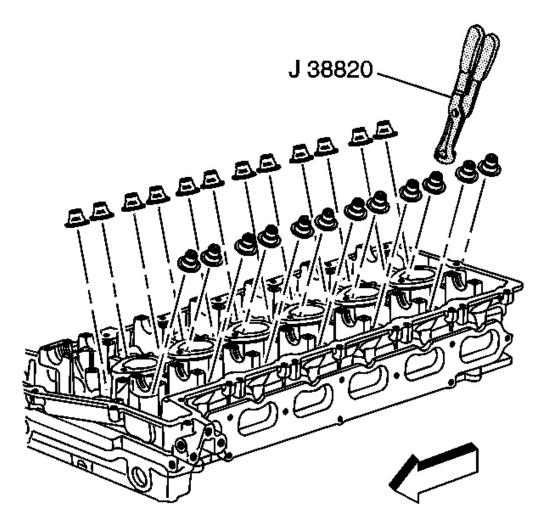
View Of J 38820 & Valve Seals Courtesy of GENERAL MOTORS CORP.
